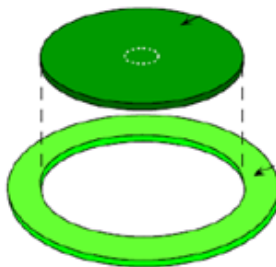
HEU Disks Are Nested Tightly Within HEU Rings in Each Unit of the Assemblies.
